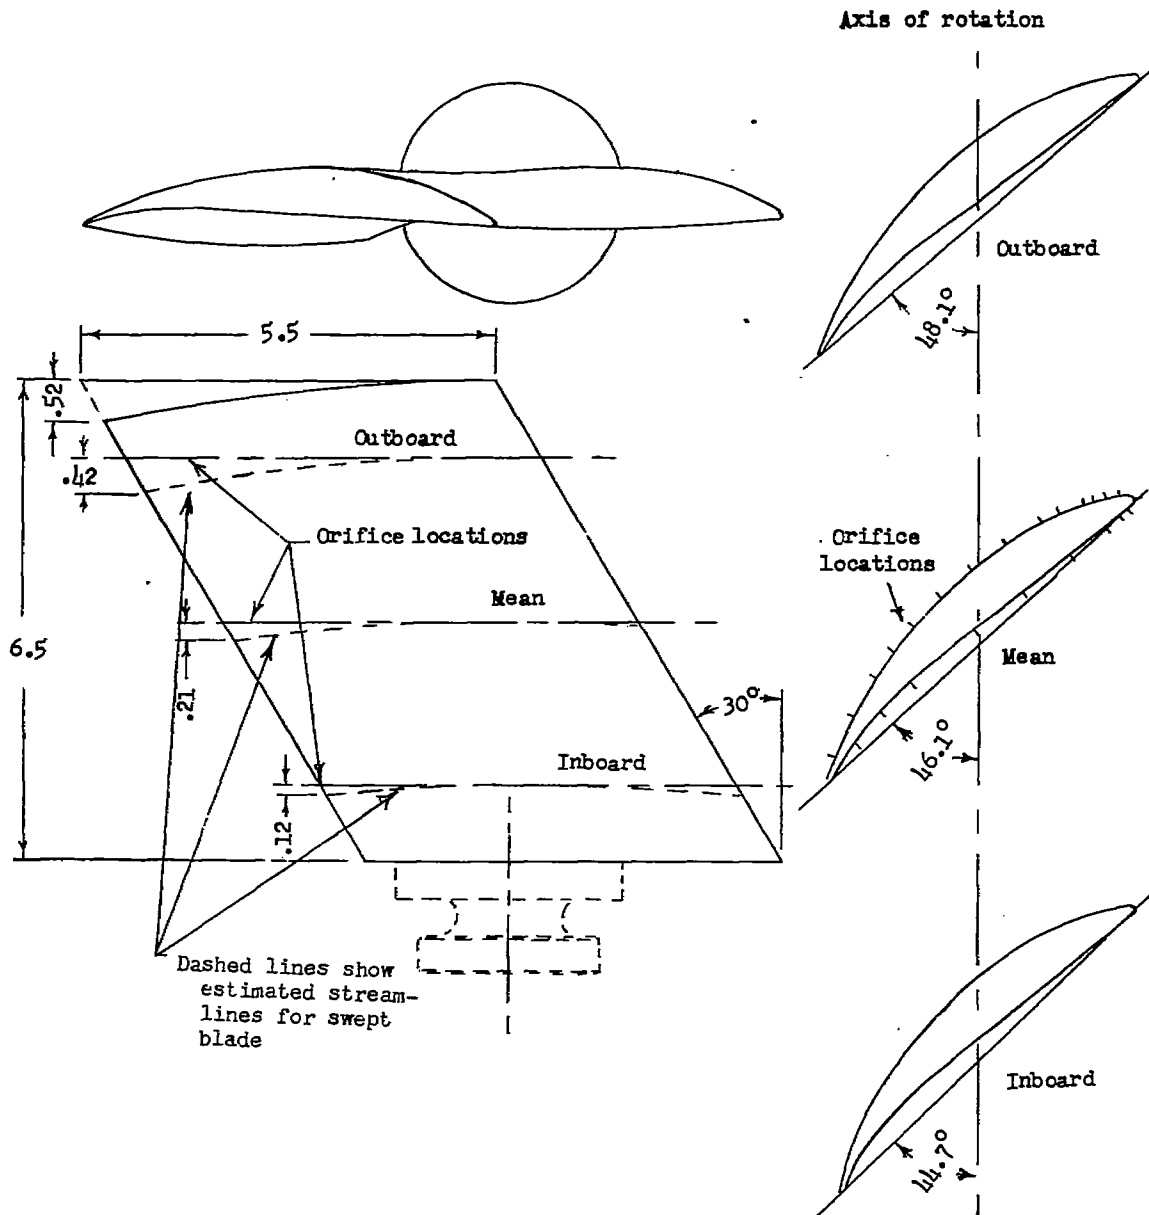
Sketch of rotor blade. Linear dimensions are in inches.
